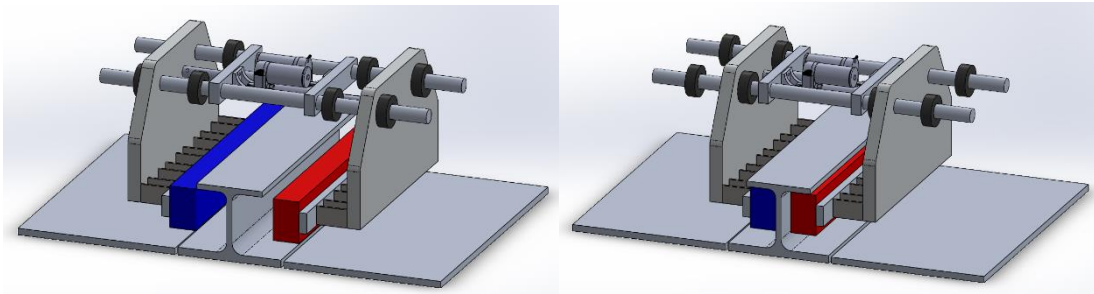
Overall appearance and layout of the old braking system assembly (Disengaged – Engaged)
